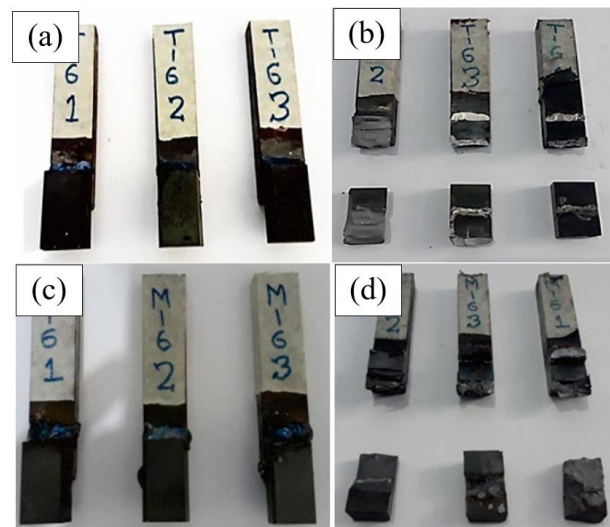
The test results for (a) TIG welding before and (b) after shear strength testing, and (c) MIG welding before and (d) after shear strength testing.
